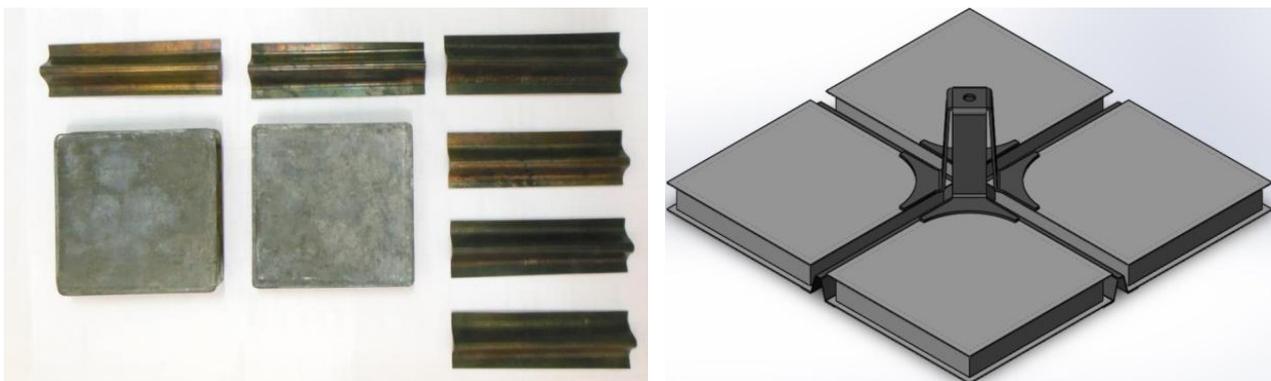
The unit that is exposed to soldering in a vacuum and its calculation scheme
